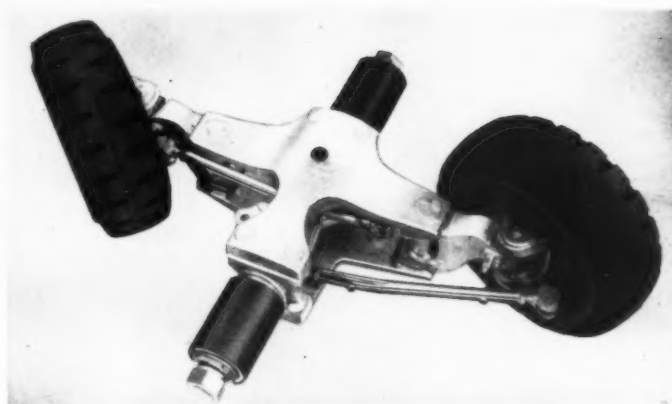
Cruciform rear axle with rubber-bushed pivot arms
